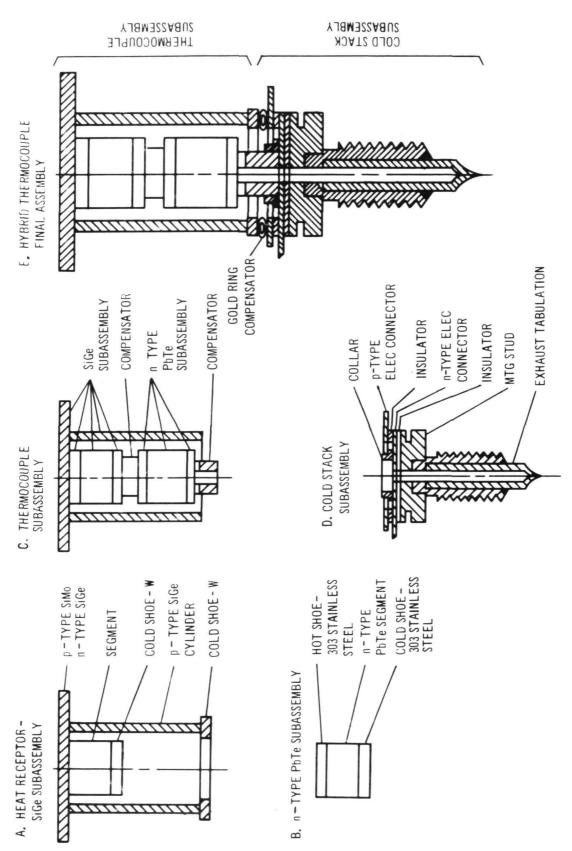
Hybrid Thermocouple Assembly Sequence - C
